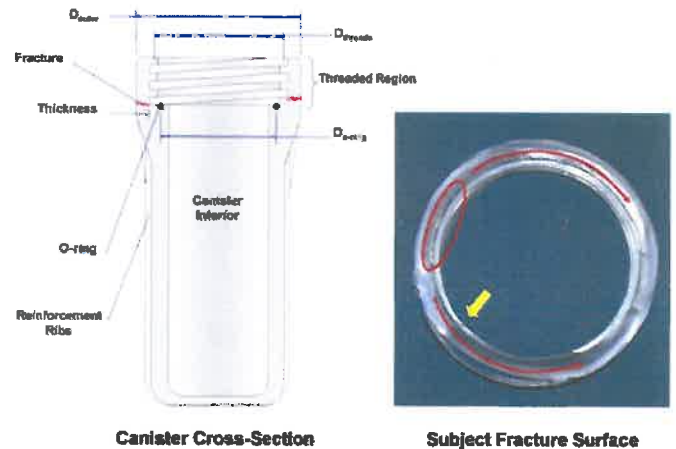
View of the clear plastic canister cross-section and subject fracture surface
